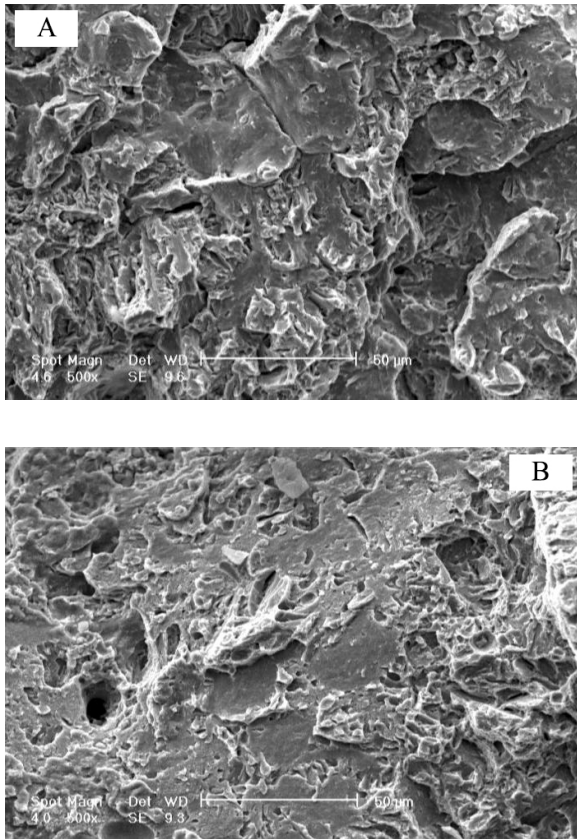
Fracture surfaces of specimens (A) T3 and (B) T4.
